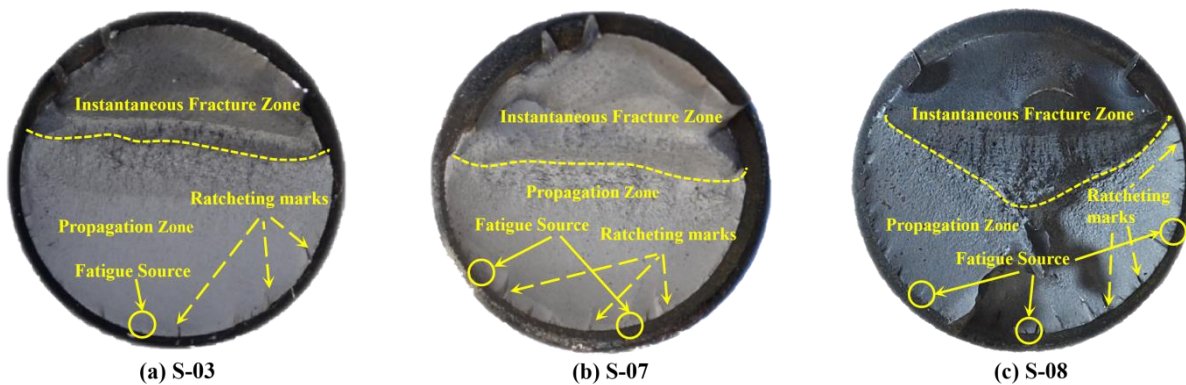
Macroscopic fracture morphology of the high-strength bolts
